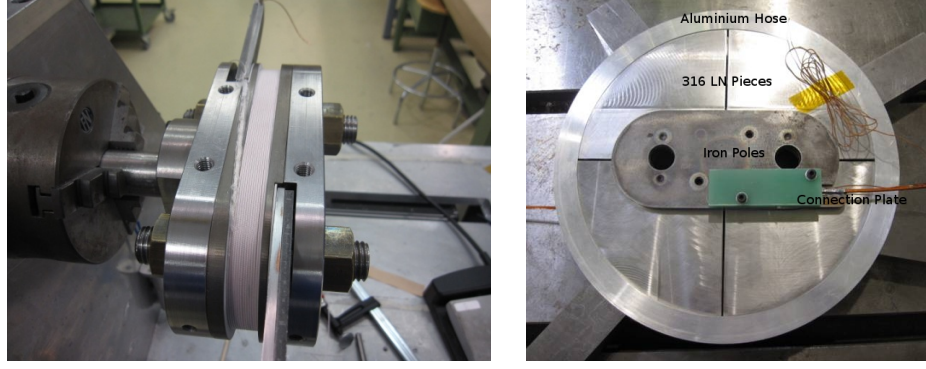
Left: test coil during manufacturing. Right: test coil in retaining mechanical structure.
